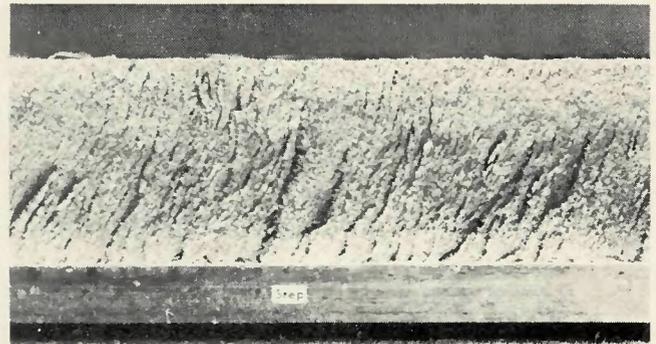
Longitudinal (penetration) profile of the two-pass electron beam weld shown in Fig. 9. Unwelded interface at the root of the weld is the vertical segment of the step shown in Fig. 9.
